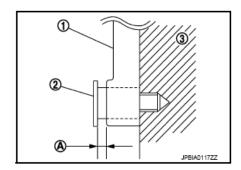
Identifying Slack Guide Mounting Bolt Installation Position Courtesy of NISSAN NORTH AMERICA, INC.
